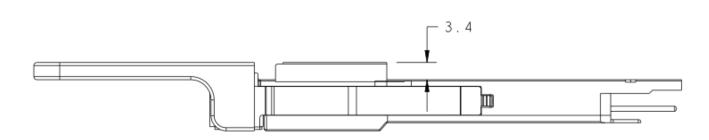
QSFP-DD1600 Module improved thermal design (bottom heat sink contact)
